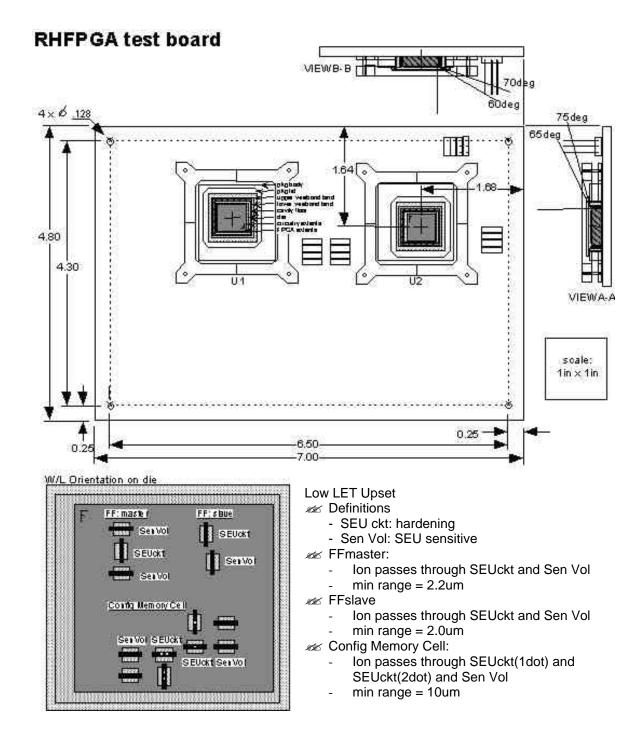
RHrFPGA Proton SEU Test Fixture and Die Layout.
